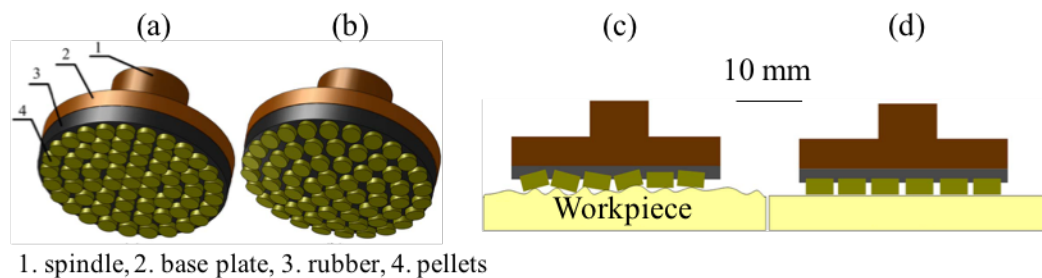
The FADP tool [119]; (a, b) planar and spherical tool configuration (c, d) pre and post the removal of MSF errors
